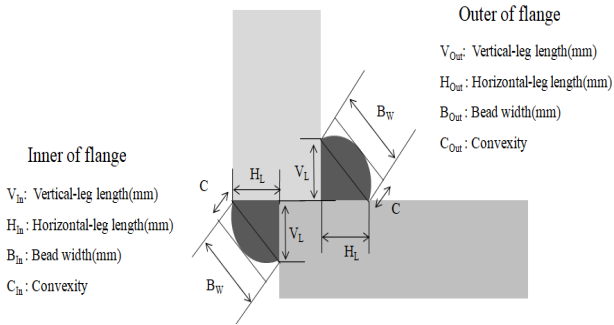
A schematic diagram of bead geometry for pipe-flange welding
